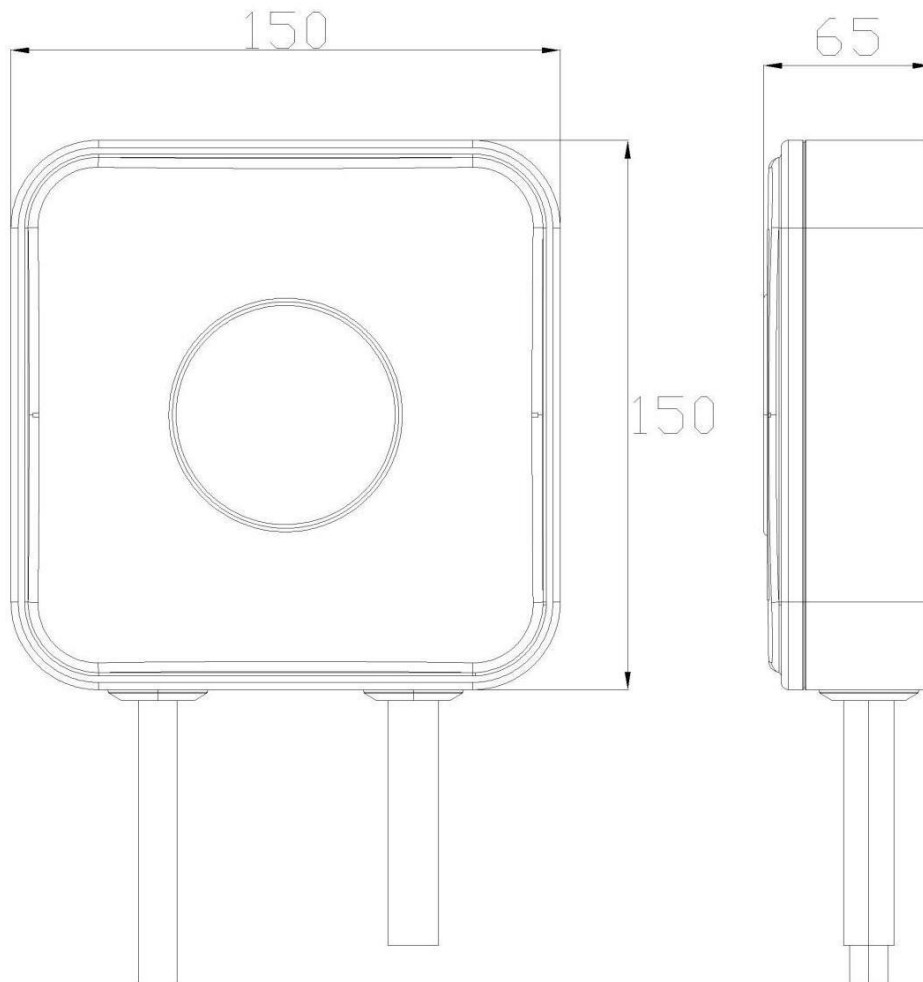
Overall Dimensions Of The Wall-Mounted Device
